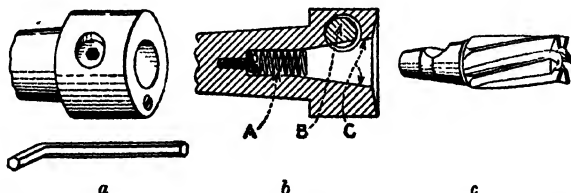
(a) Brown & Sharpe "cam-lock" adapter. (b) Sectional view showing: A, the spring to keep the shank of the end mill floating to ensure correct seating; B, camlock, draws the end mill securely into taper and locks it there; C, standard milling-machine taper for quick release. (c) End mill with cam-lock shank.
